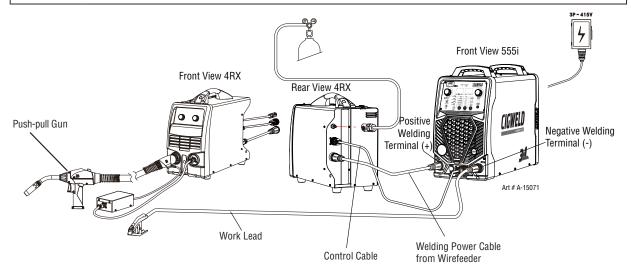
Setup for PUSH PULL GUN MIG (GMAW) Welding with Gas Shielded Mig Wire
